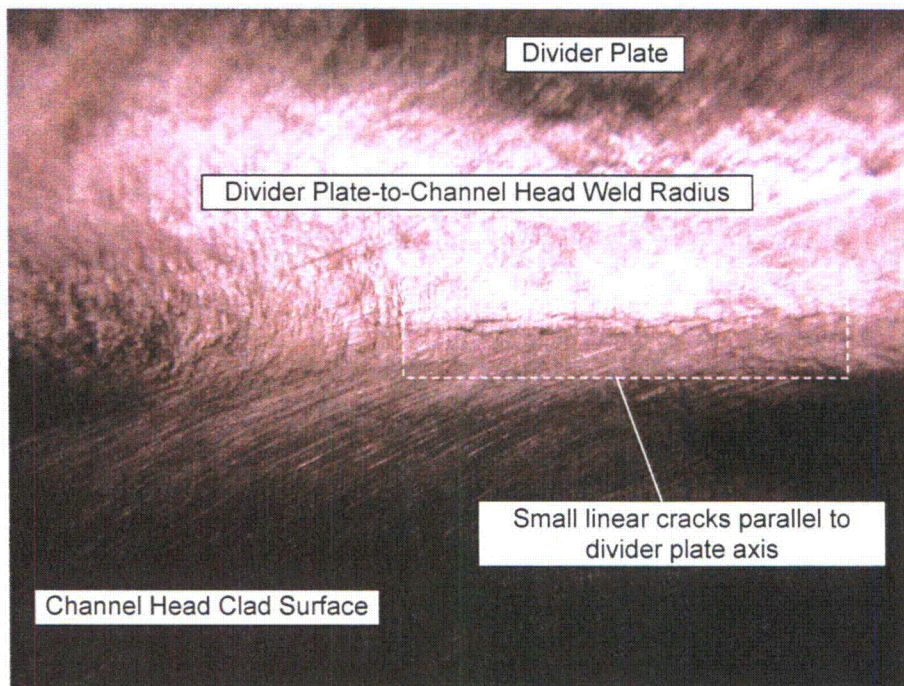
RSG 3A Hot-Side Divider Plate-to-Channel Head Weld PT Indications
